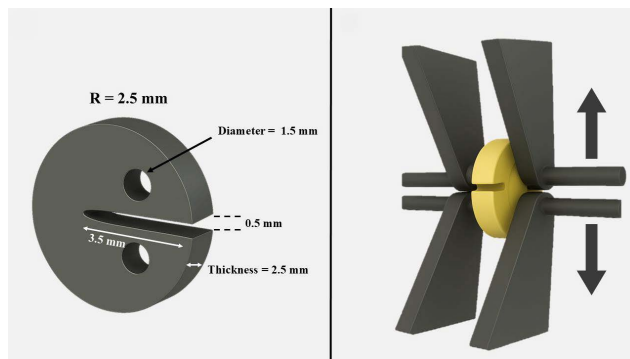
Dimensions and shape of the composite specimen and the fracture toughness testing apparatus.
